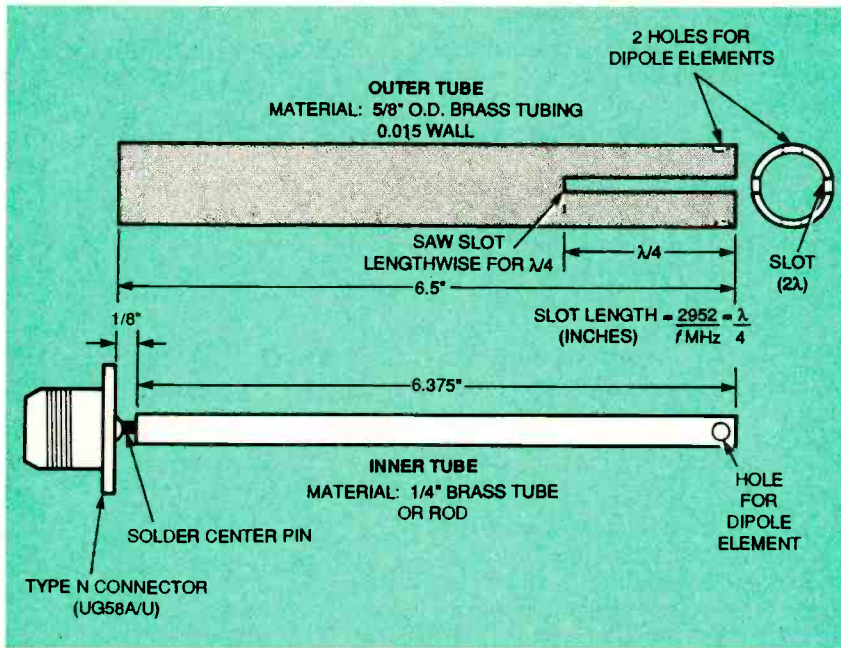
PRE-ASSEMBLY DETAILS of the feedline/balun tubes. For 400 to 470-MHz operation of the corner-reflector antenna the outer tube length should be increased to 14 inches; the inner tube, 13.785 inches.
